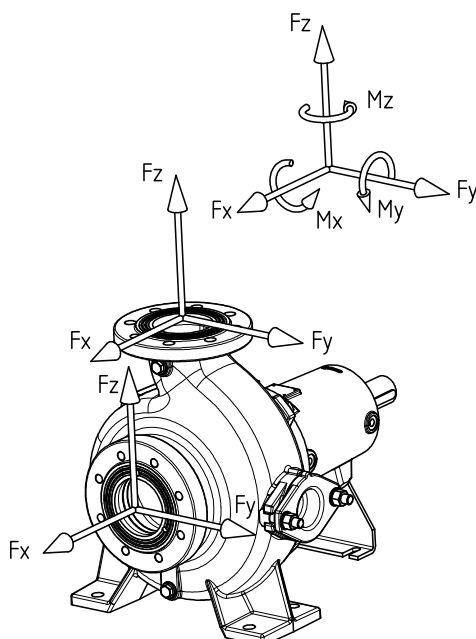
Forces and moments at the pump nozzles for horizontal installation, bare-shaft pump (Figure O)
